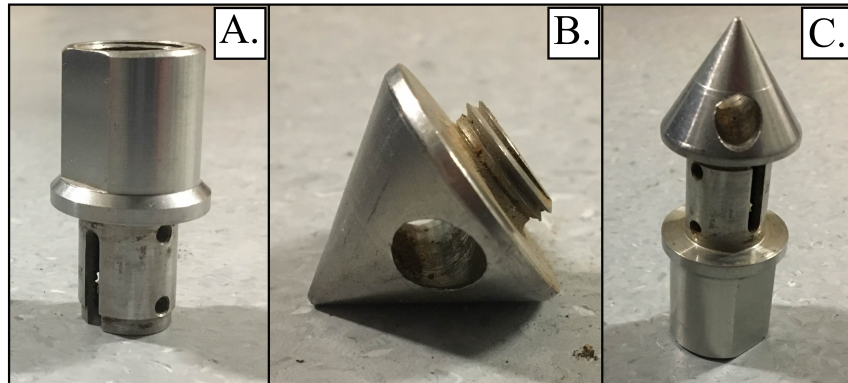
Main body of the SBPVP (A) Probe shank, including wiring holes and a slot for the tracer line, is inside threaded on both ends to be attached to pipe (on the top) and to the probe tip (on the bottom). (B) Probe tip, with a hole included to allow for tightening with tools. This piece is pointed to allow for easier installation at the groundwater-surface water interface. (C) The two pieces, as they fit together.
